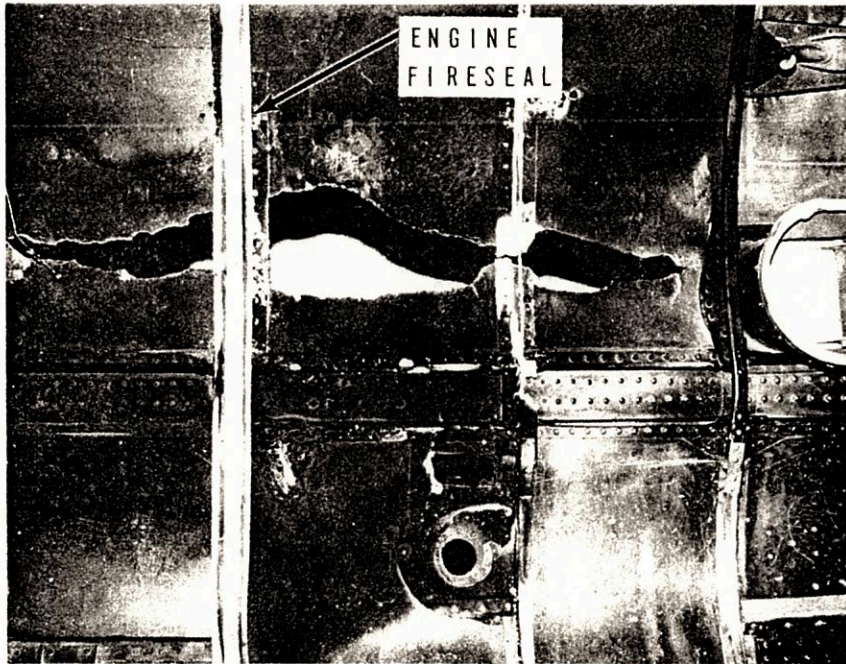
DAMAGED SURGE BLEED SEAL AND RESULTING COWL DOOR DAMAGE, INTERNAL VIEW
